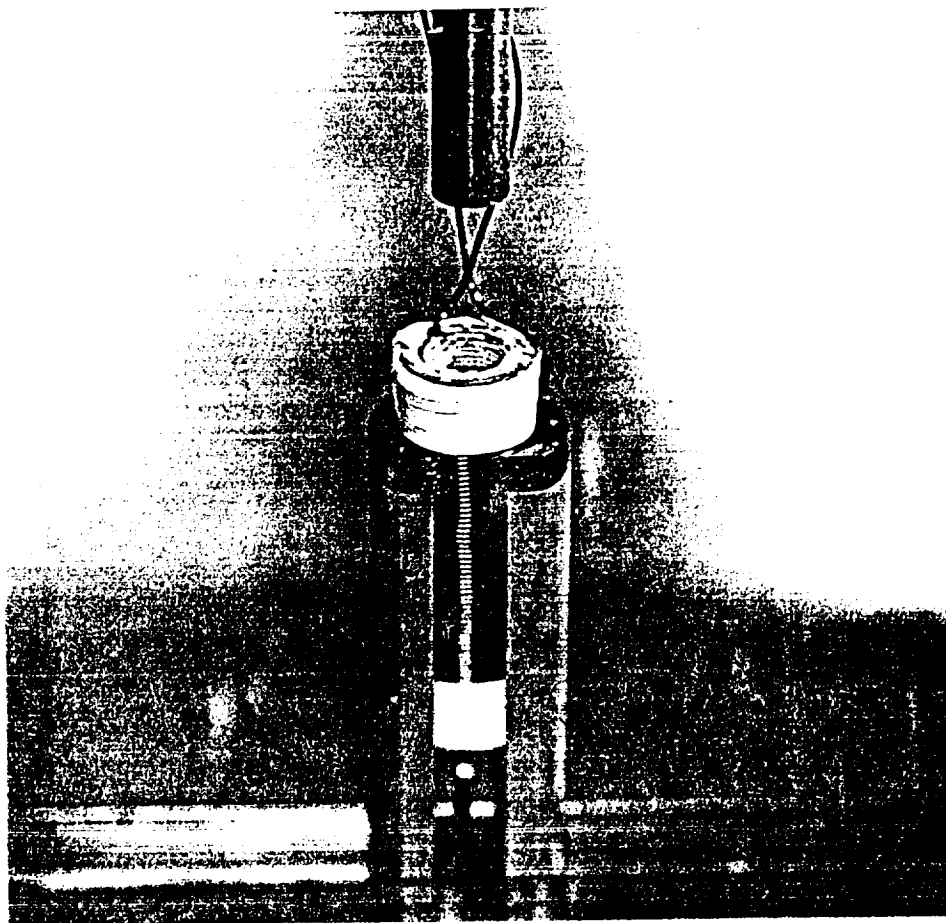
Photograph of room temperature magnetostrictive actuator being assembled.
